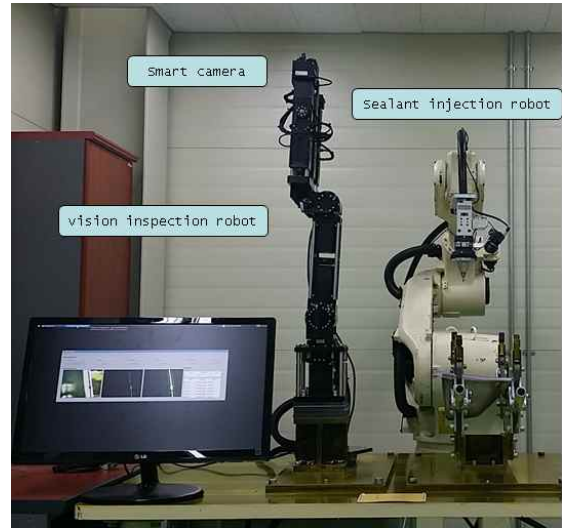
Test environment for vibration adaptive vision inspection system. Outside this room, five press machines are operating with its operating period.
